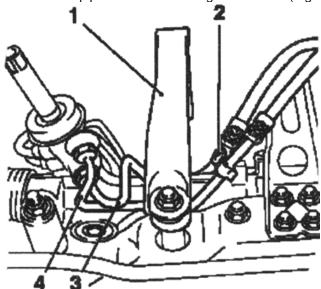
Withdrawal pipeline with steering th mechanism:
